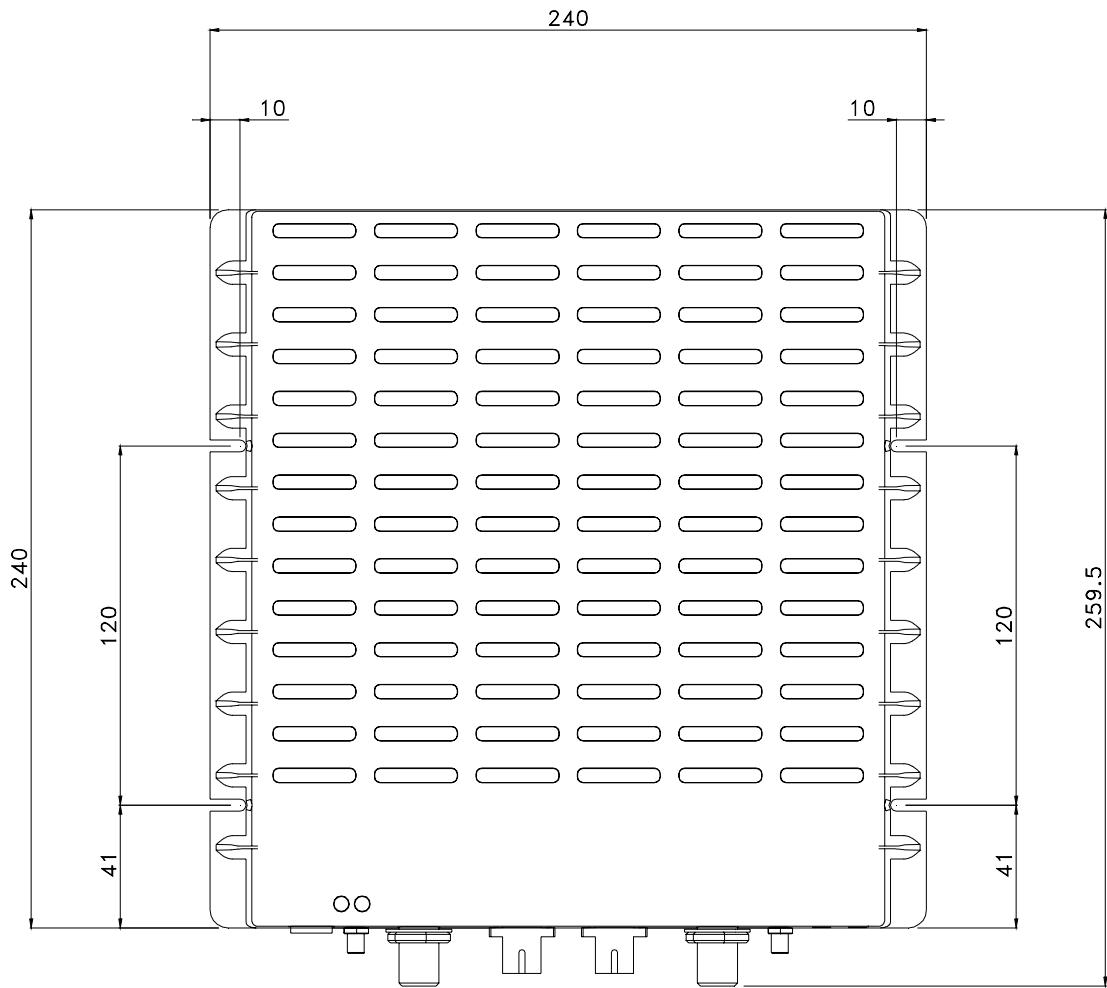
(a): CASE B layout with wall anchor quotes
